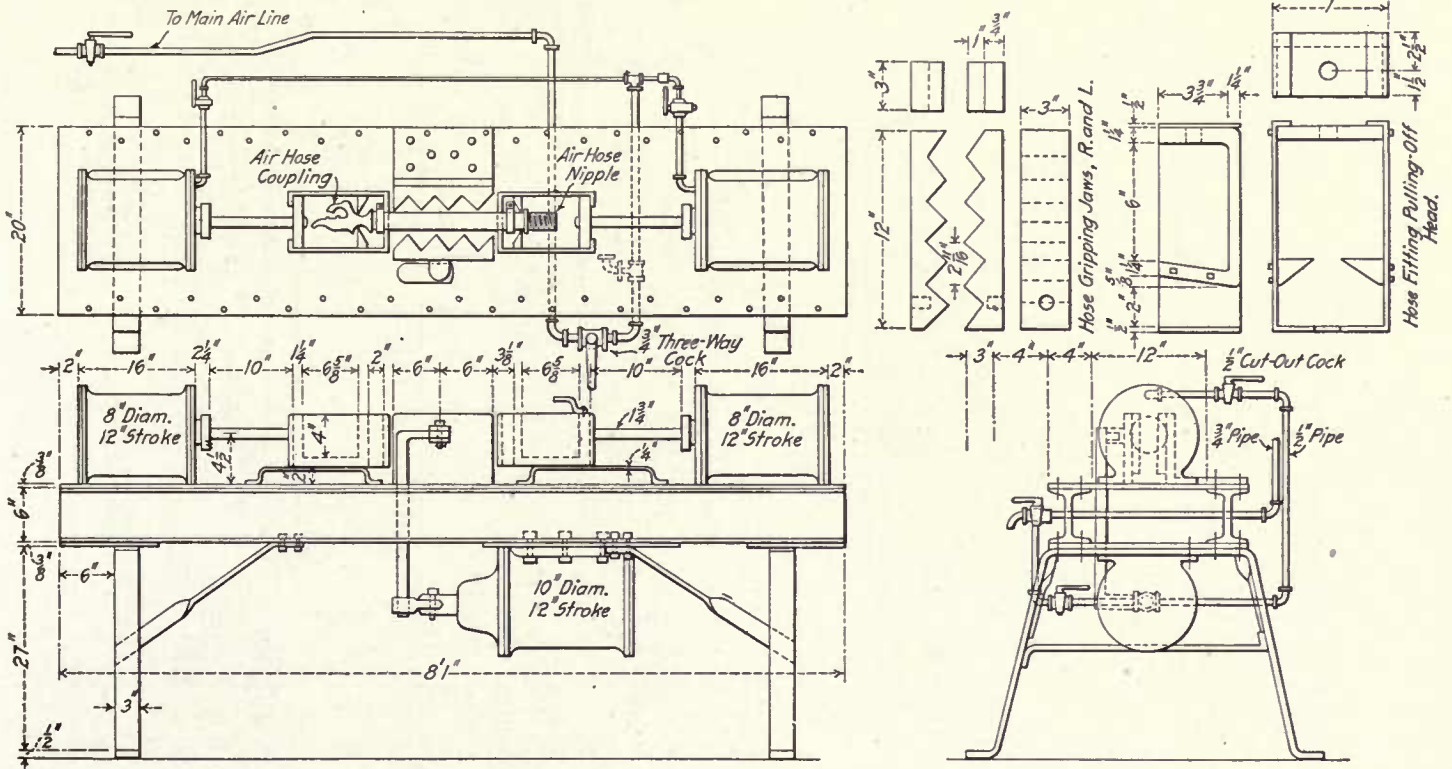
Machine for Stripping the Fittings from Air Hose.
